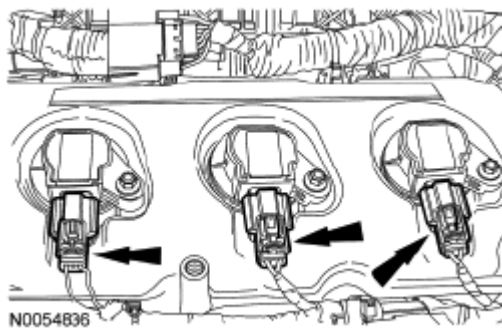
Locating LH Coil-On-Plug Electrical Connectors
